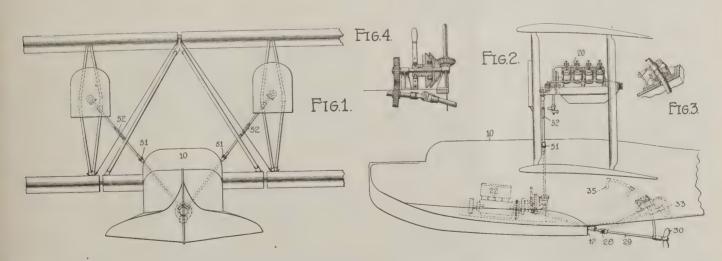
Front elevation. Fig. 2—Side elevation. Fig. 3—Detail of lock for holding propeller shaft in position. Fig. 4—Longitudinal section of clutch mechanism and connections.
